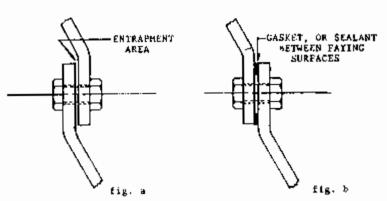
REDESIGN OF STRUCTURAL DETAIL TO ELIMINATE CREVICE CORROSION SITE
